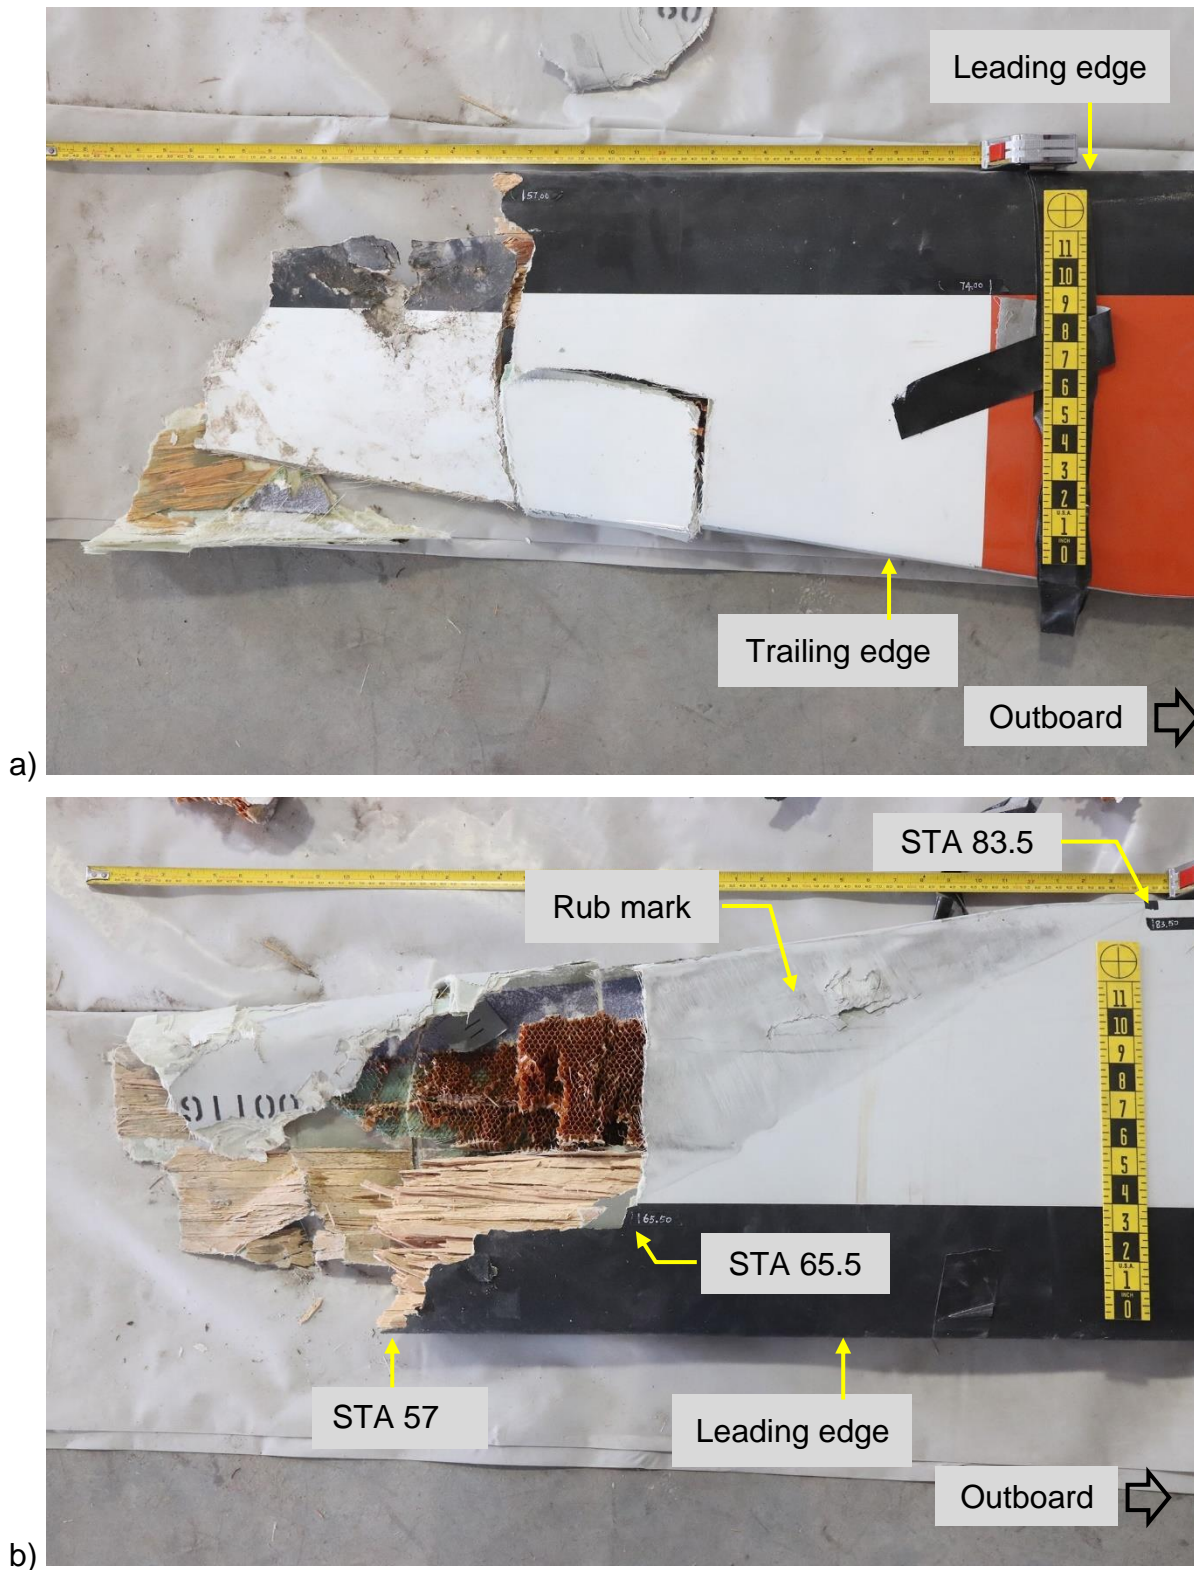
Images of the outboard side of the LHR (473B) blade root fracture: a) upper surface and b) lower surface.
